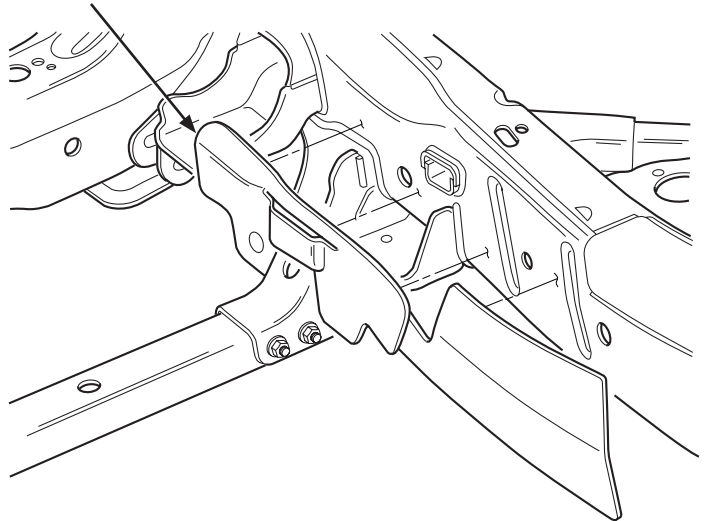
REMOVE CLEAR BACKING FROM SHIELDS PRIOR TO INSTALLING. THE FOIL FACE FACES AWAY FROM THE FRAME RAIL.
